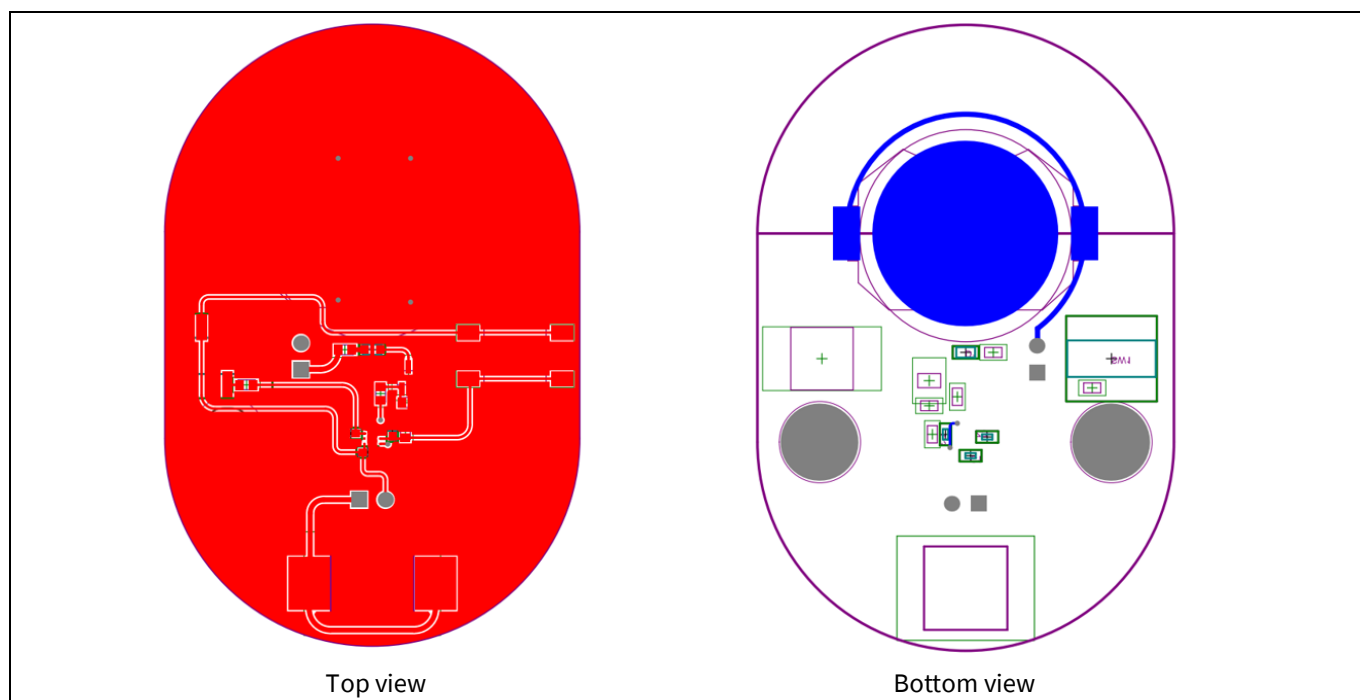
XENSIV™ TLV55624-10 evaluation kit PCB layout
